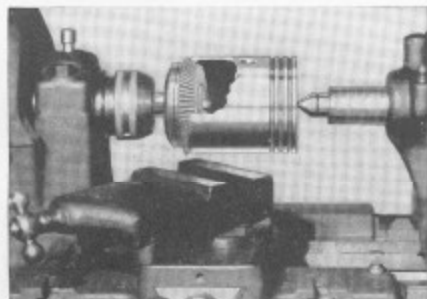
Reaming the Skirt of a Piston. Reamer is Held on Piston Adapter Shank.
